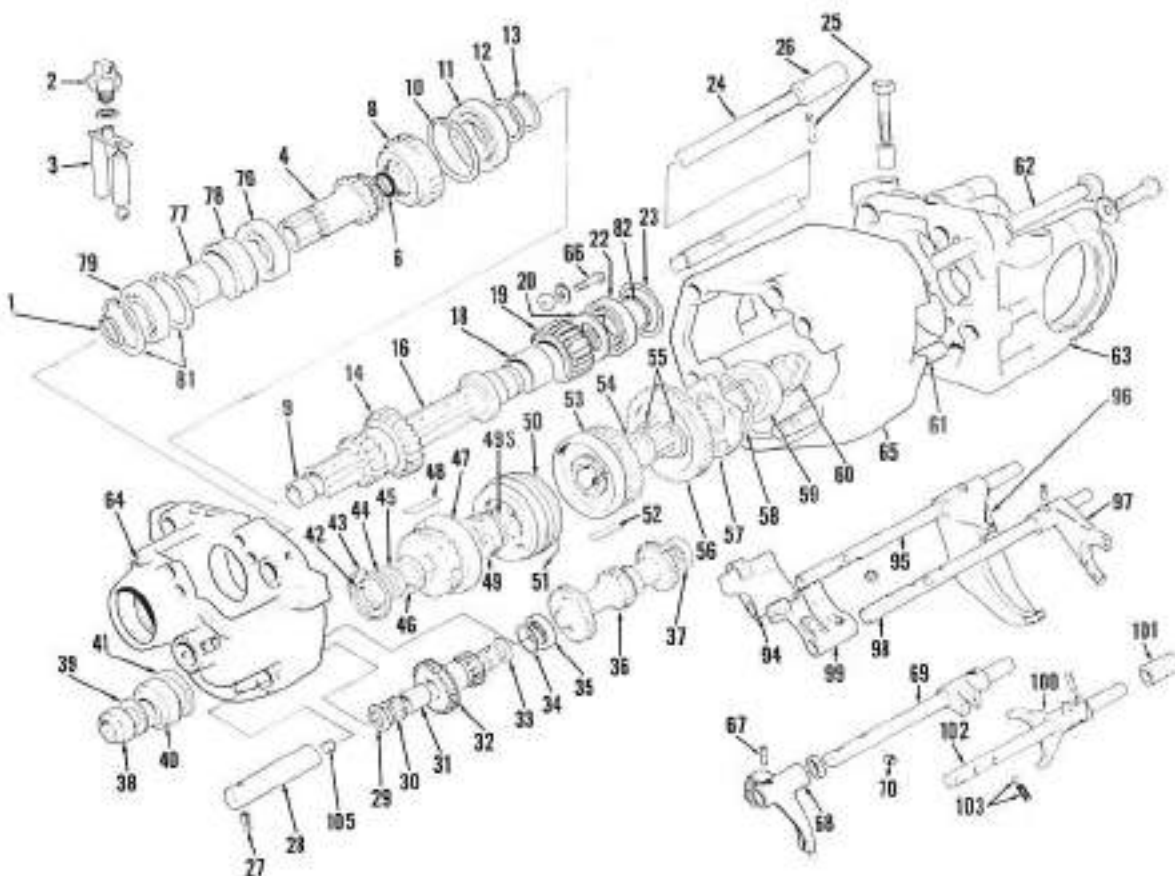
Exploded view of transmission gears, shafts and associated parts used for Model 1210. Refer to Fig. 108 for 885, 885N and 995 models and to Fig. 113 for 1410 model.
